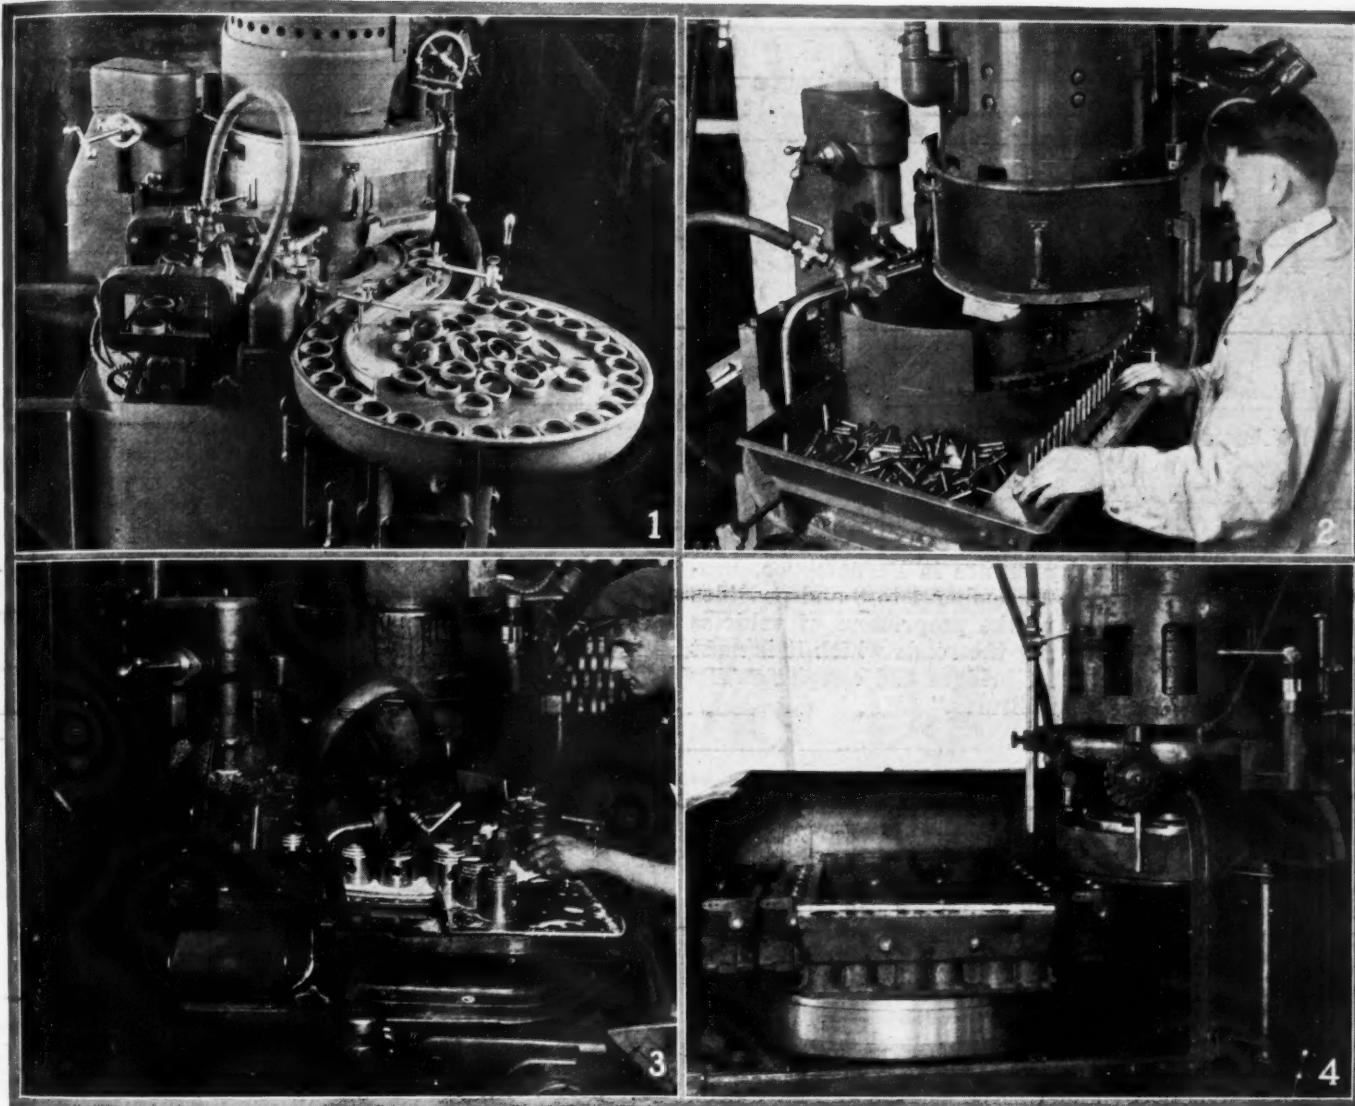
Ball races on dial loading device of automatic grinder. Fig. 2—Valve tappets on automatic grinder. Fig. 3—Grinding cast iron piston tops. Fig. 4—Grinding top and bottom surfaces of cylinder blocks
